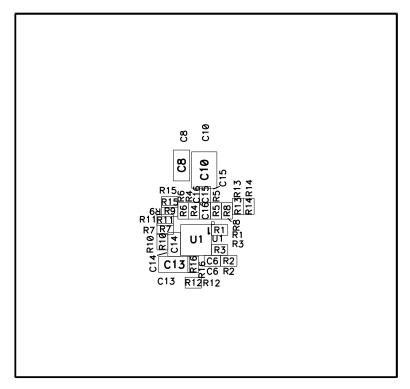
Bottom Layer Assembly Drawing (bottom view)
